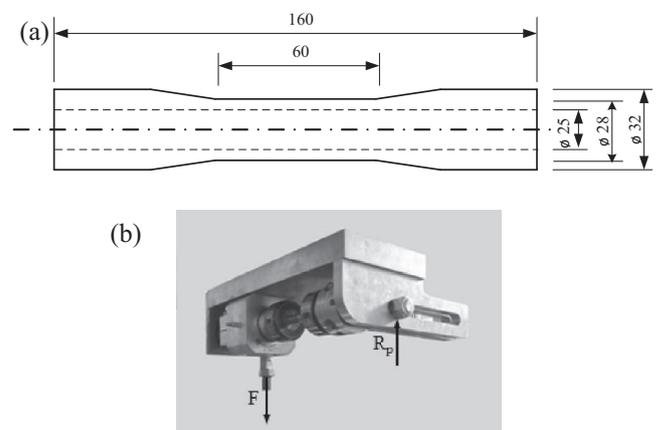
Specimens geometry and fatigue testing device. (a) Tubular specimen. (b) Bending/torsion testing device.
